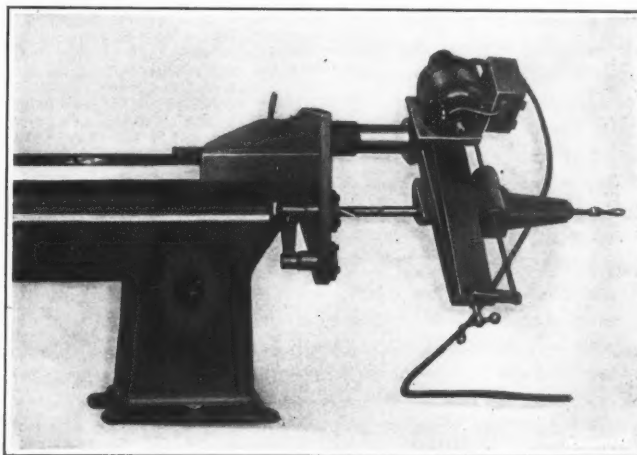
Drilling Holes in Feed-screw and Lead-rod Bracket at Tailstock End of Bed
